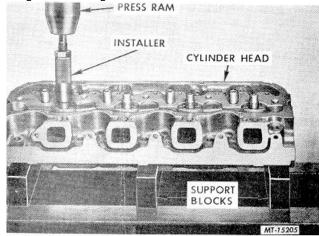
Installing Exhaust Valve Guides with SE-1943 Installer
